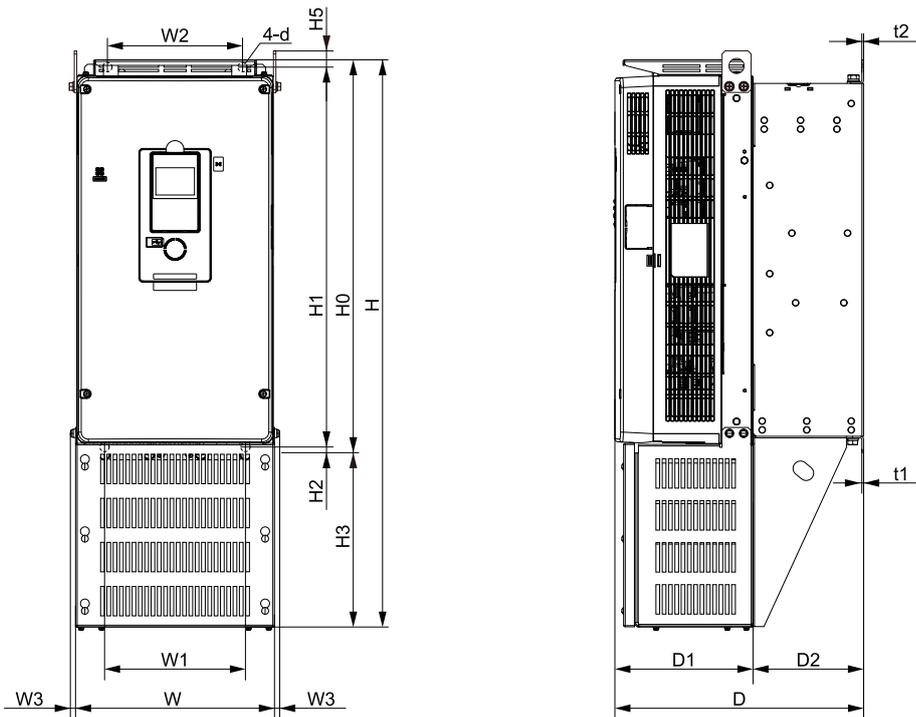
Exterior and Mounting Dimensions Diagram 6
